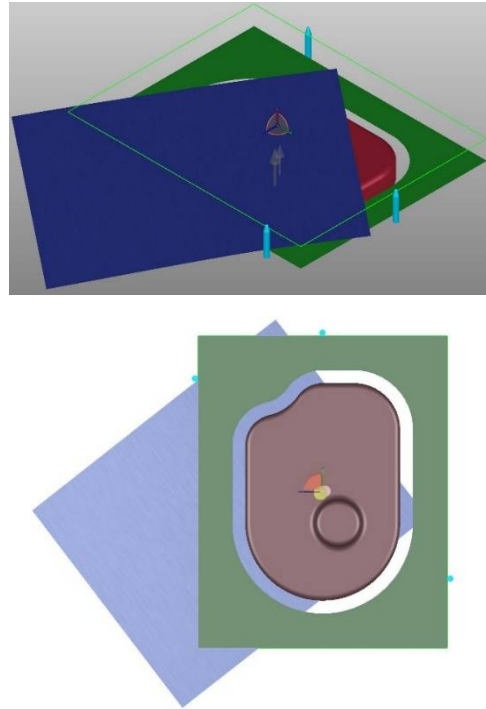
Improper positioning and displacement of the blank from the blank-holder
